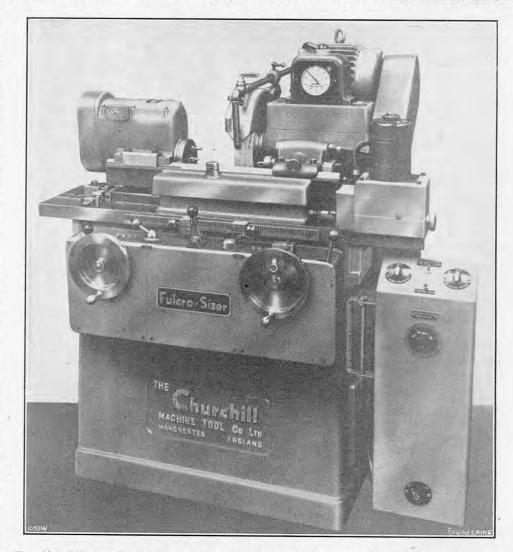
"Fulcro-Sizer" Plain Grinding Machine; Churchill Machine Tool Co., Ltd.
